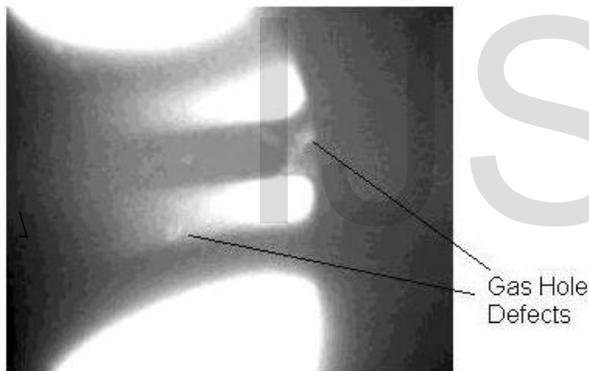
Gas hole defect in Al alloy cast wheel [11]
